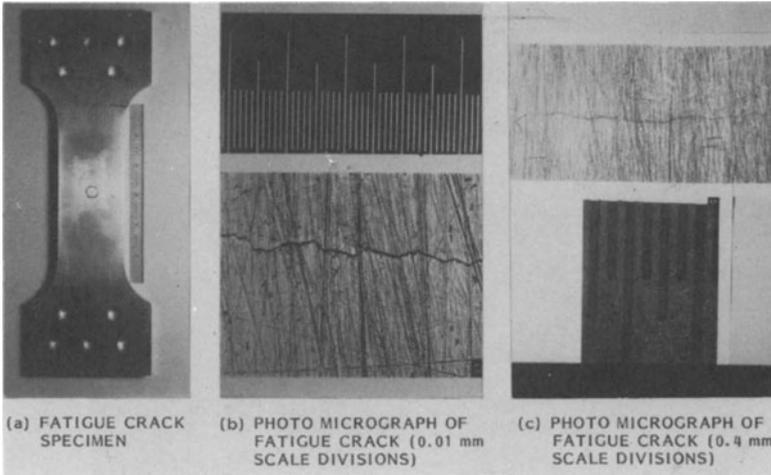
Optical photographs of the fatigue crack in aluminum.
